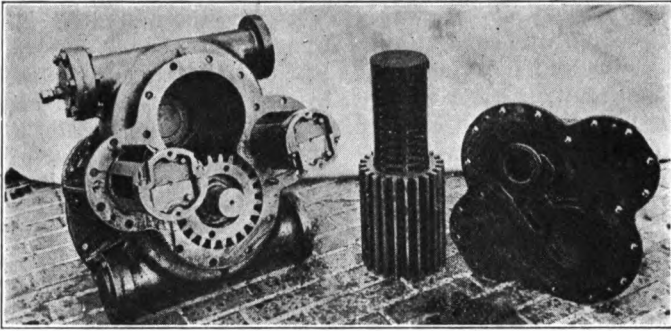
THE OIL-PUMP DISASSEMBLED INTO ITS VARIOUS PARTS
